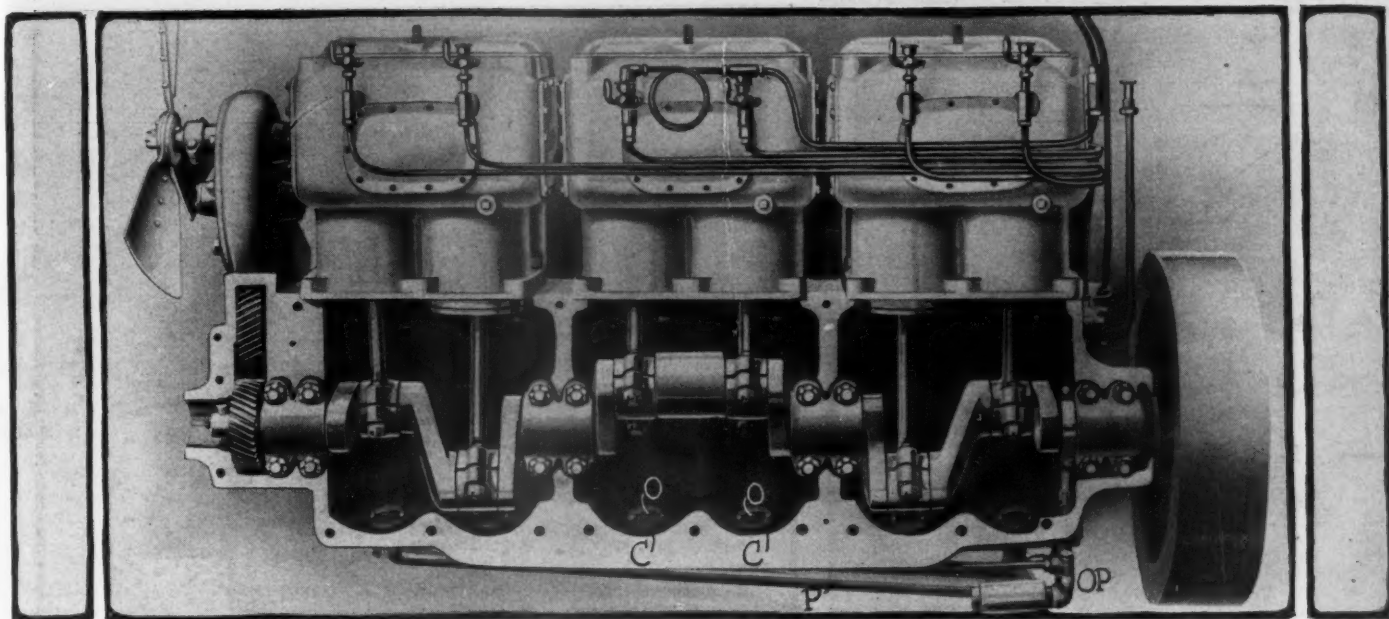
WINTON 1912 SIX-CYLINDER MOTOR SHOWING OILING SYSTEM
